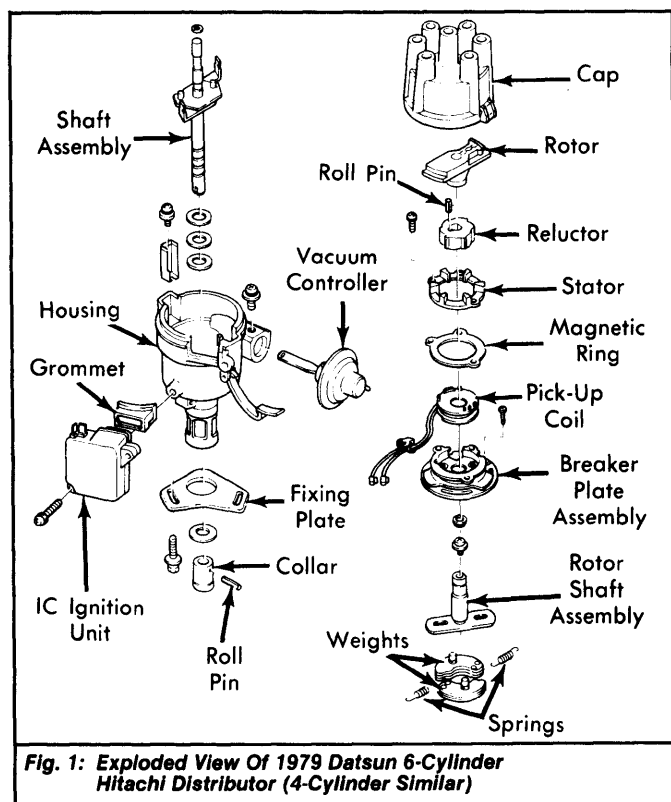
Exploded View Of 1979 Datsun 6-Cylinder Hitachi Distributor (4-Cylinder Similar)
